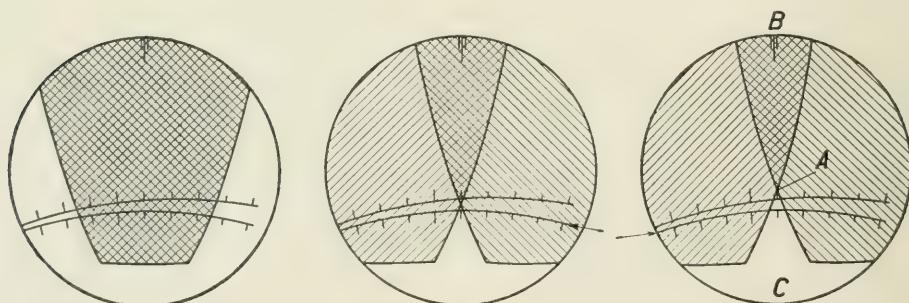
Field of view of the tooth-wheel testing apparatus.
